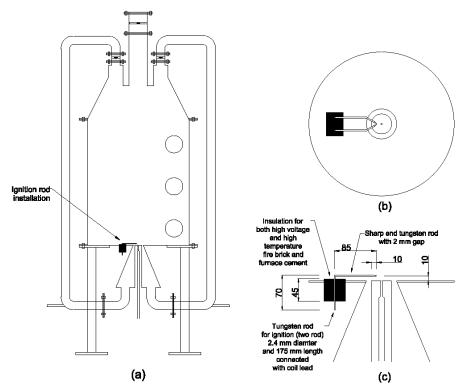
Schematic diagrams of combustion chamber, (a) ignition rod location, (b) location plan view and (c) location side view of ignition location and installation
